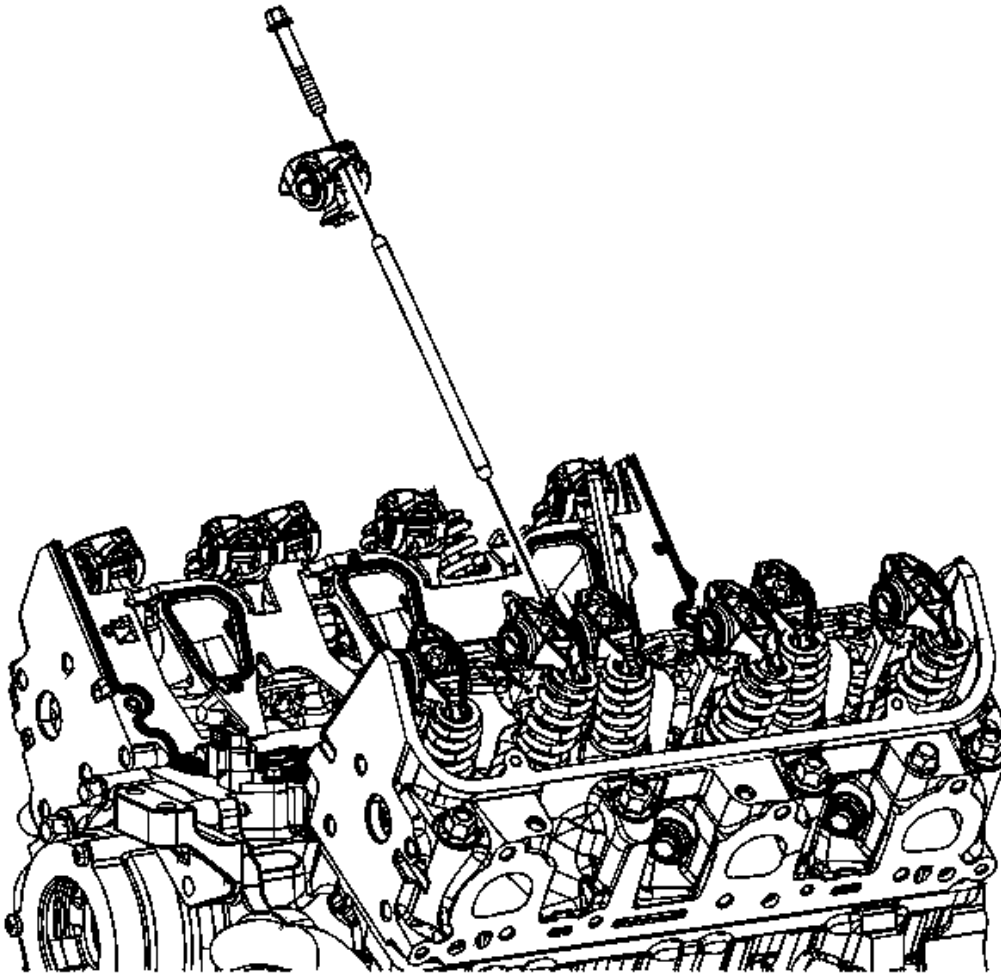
Valve Rocker Arm, Bolt & Push Rod
